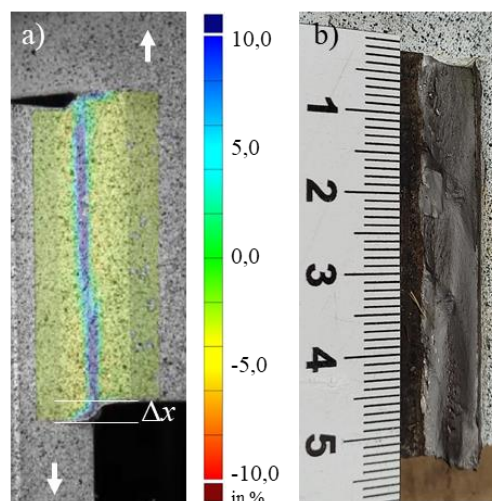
Fillet weld with G46 a) deformation behaviour with ARAMIS, b) fracture surface
